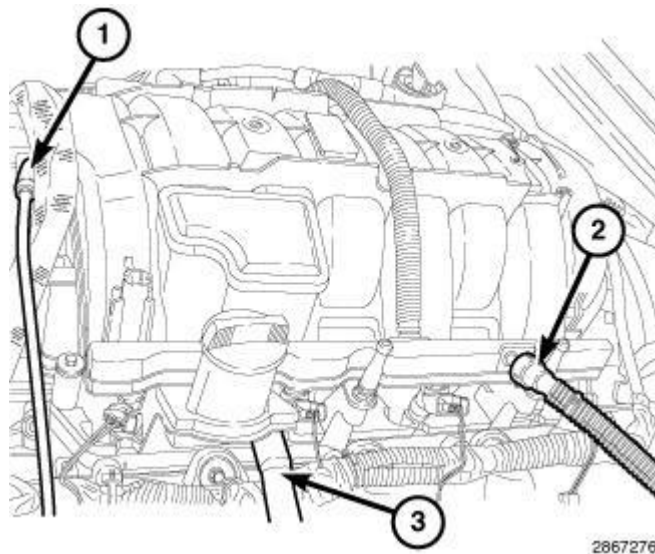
EVAP Vacuum Line, Fuel Supply Line & Make Up Air Hose
